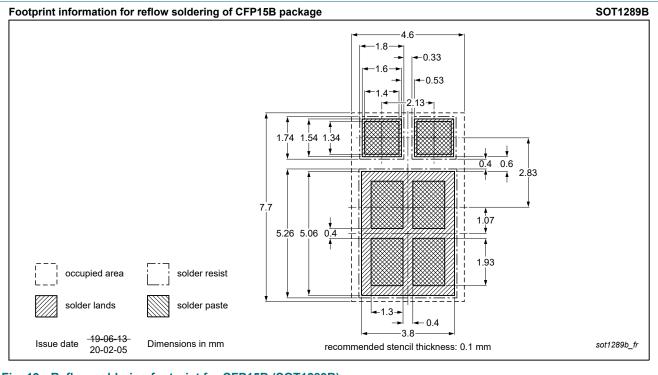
Reflow soldering footprint for CFP15B (SOT1289B)
